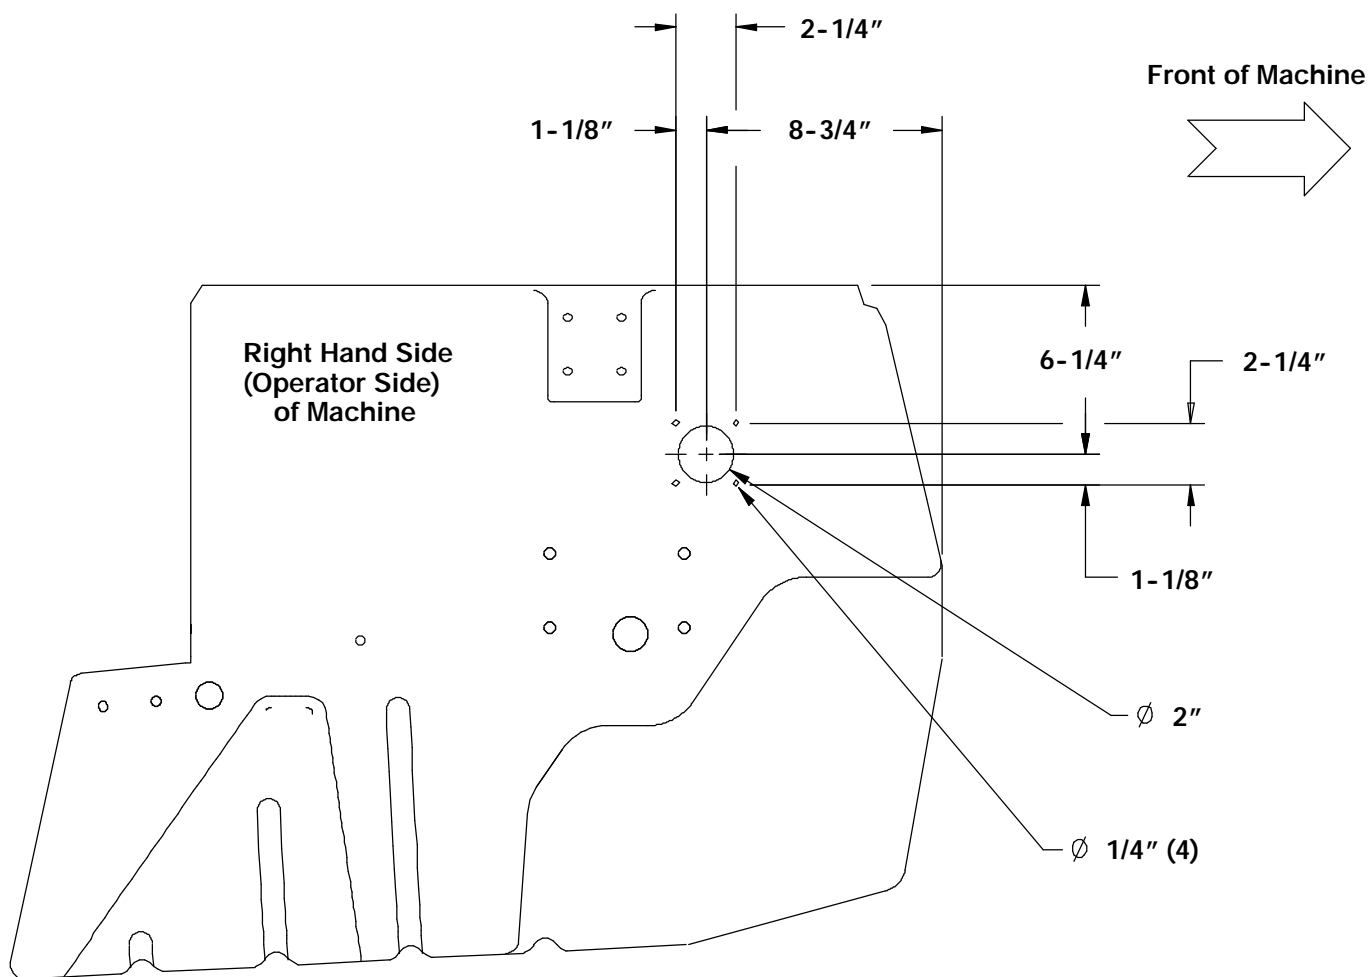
Location of Holes to be Drilled for Vac Wand Adaptor
